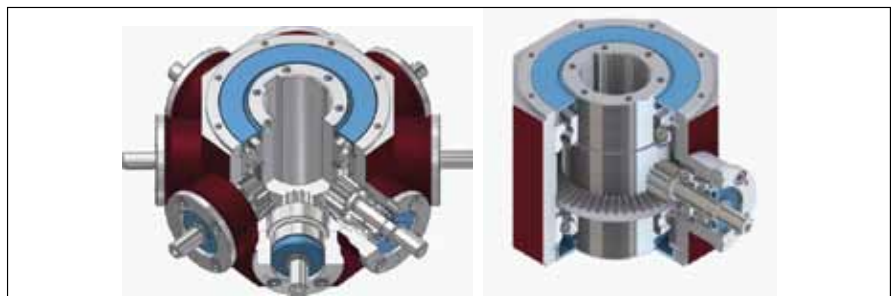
Octodrive gearbox (sectional view) in different configurations.
